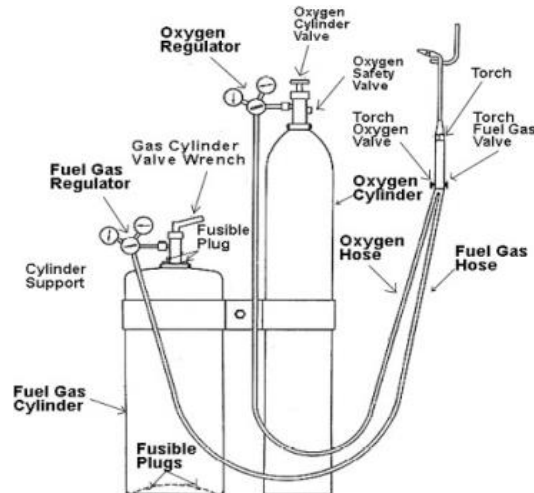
Diagram Showing Gas Welding Equipment
